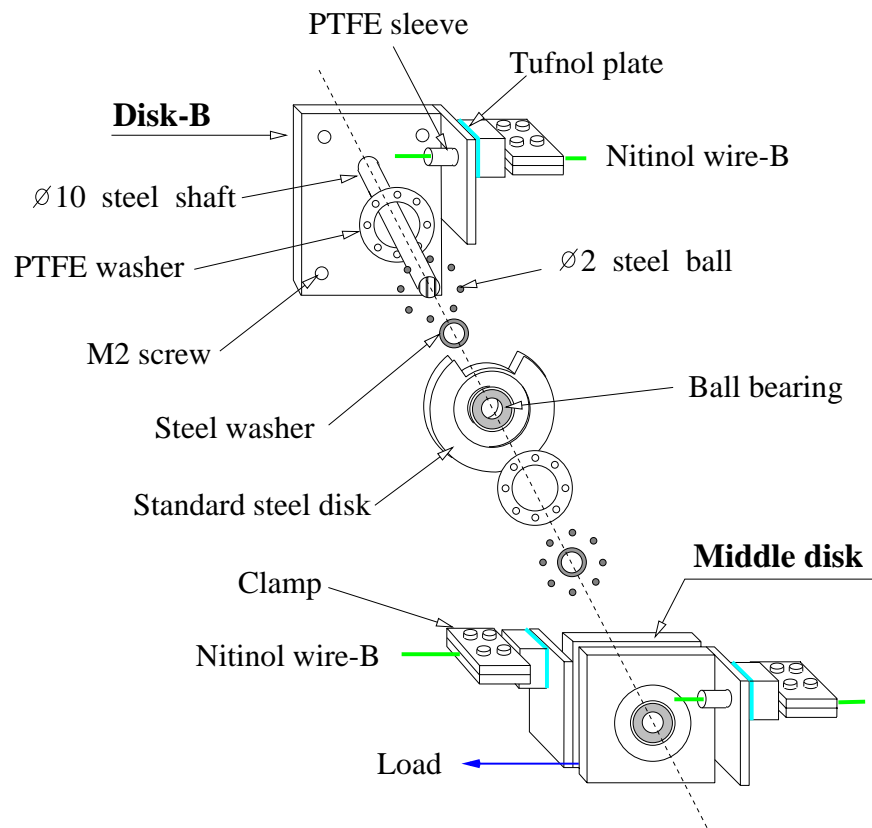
Exploded view of side-B of two-way wire actuator.
